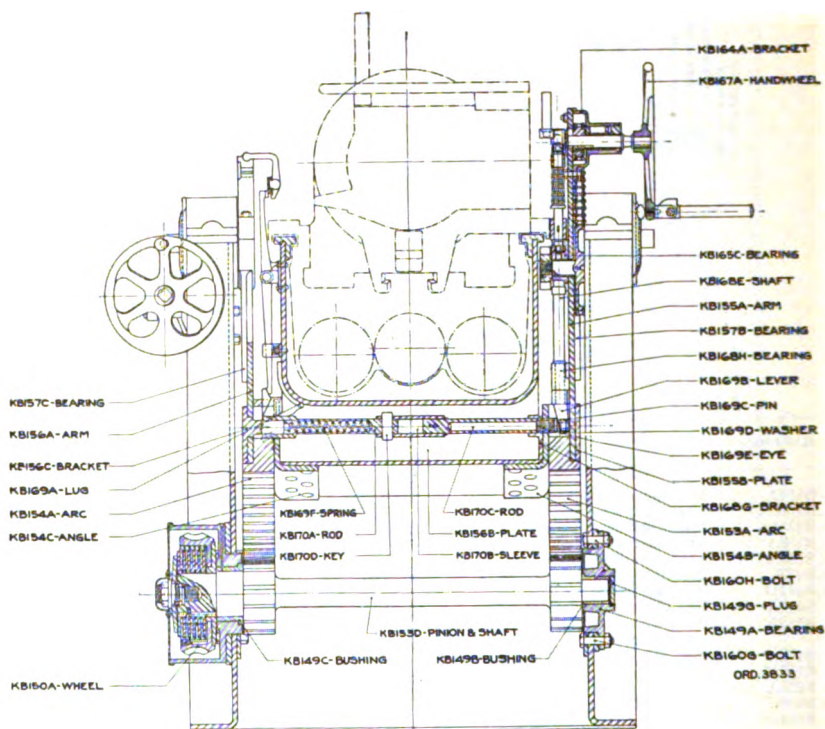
Elevating and quick loading mechanism (rear view)
